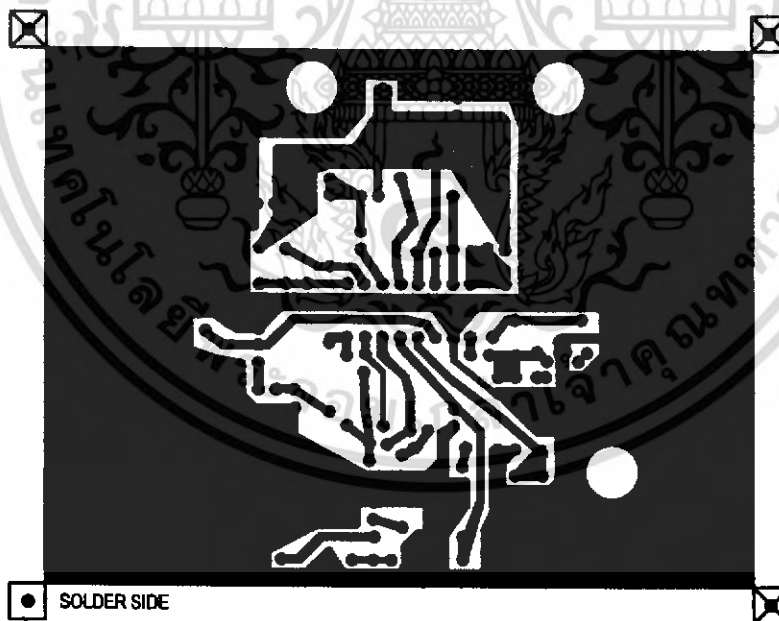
MC3372P PC Board Circuit or Solder Side as Viewed through Component Side
